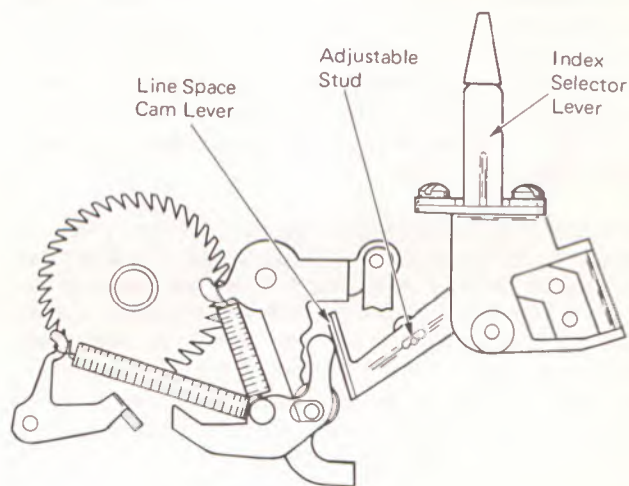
54 Tooth Index Mechanism (Right Side View)
